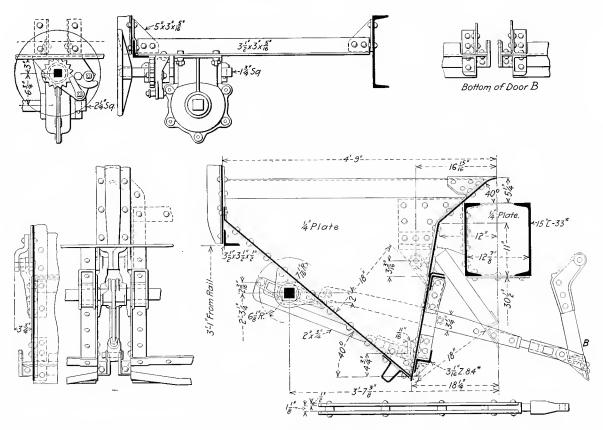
Door Operating Apparatus for Center Dump Ballast Car. Enterprise Railway Equipment Company.
